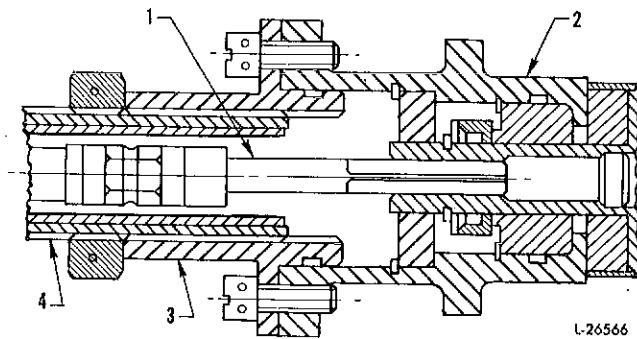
G-7. Flexible Shaft Assembly - Alignment for Insertion into Fuel Control
